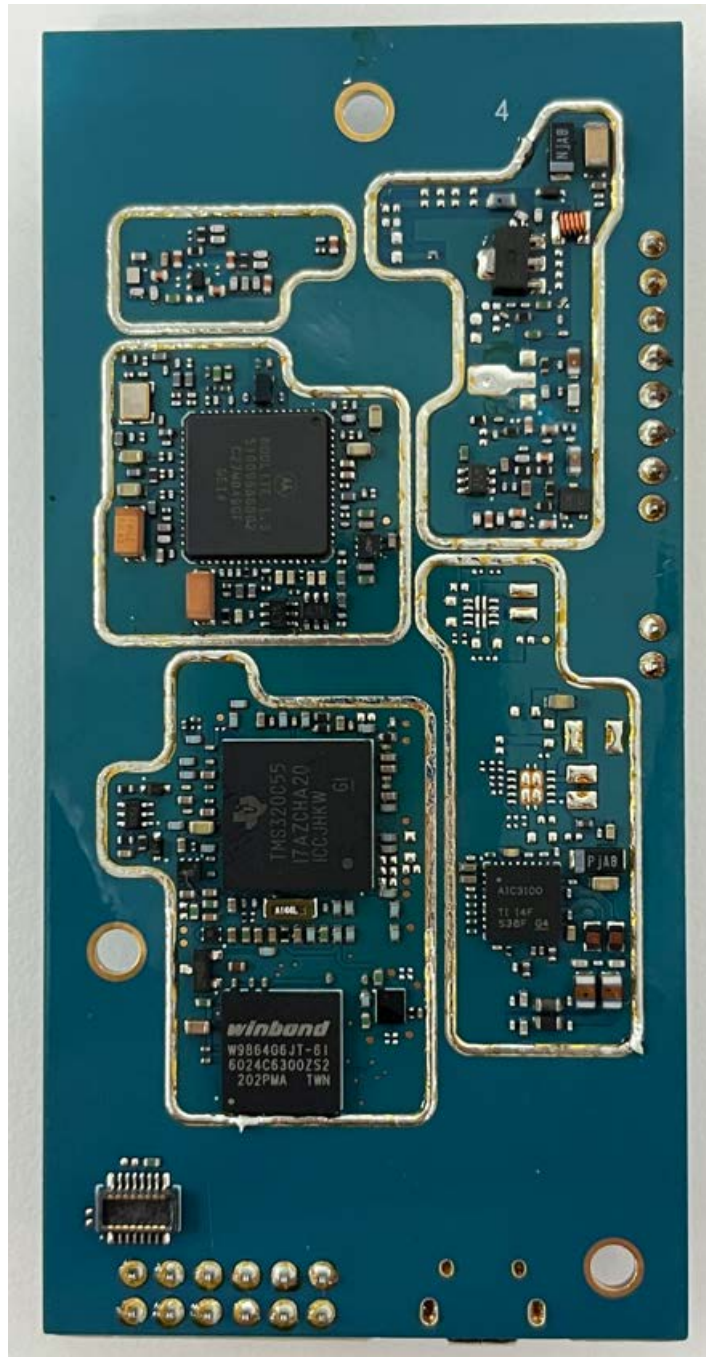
E - RF boards with chassis and housing for (Front Side)
